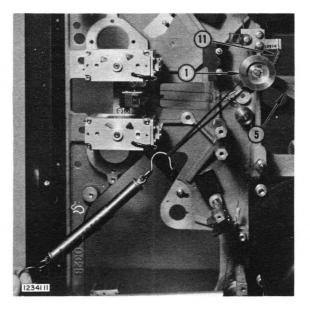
Figure 5-17b. Removing Capstan Drive Belt
